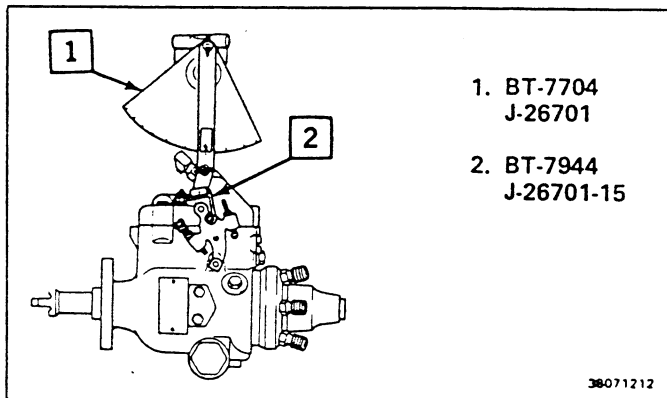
C5-9 Vacuum Regulator Valve Adjustment
